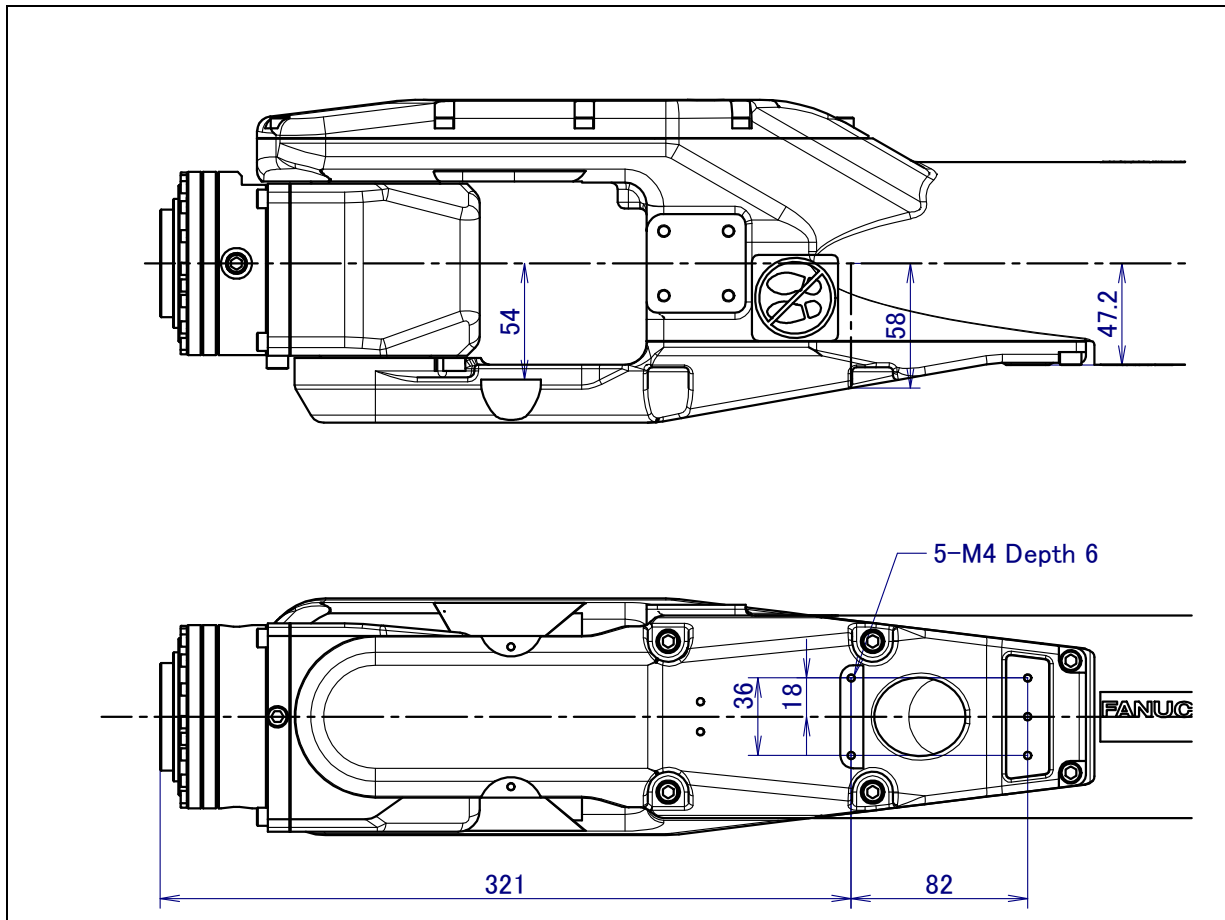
(d) Equipment mounting faces (for the cable clamp) (M-10iA/10M/10MS)
